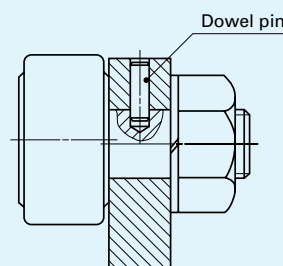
Mounting example of Solid Eccentric Stud Type Cam Follower
